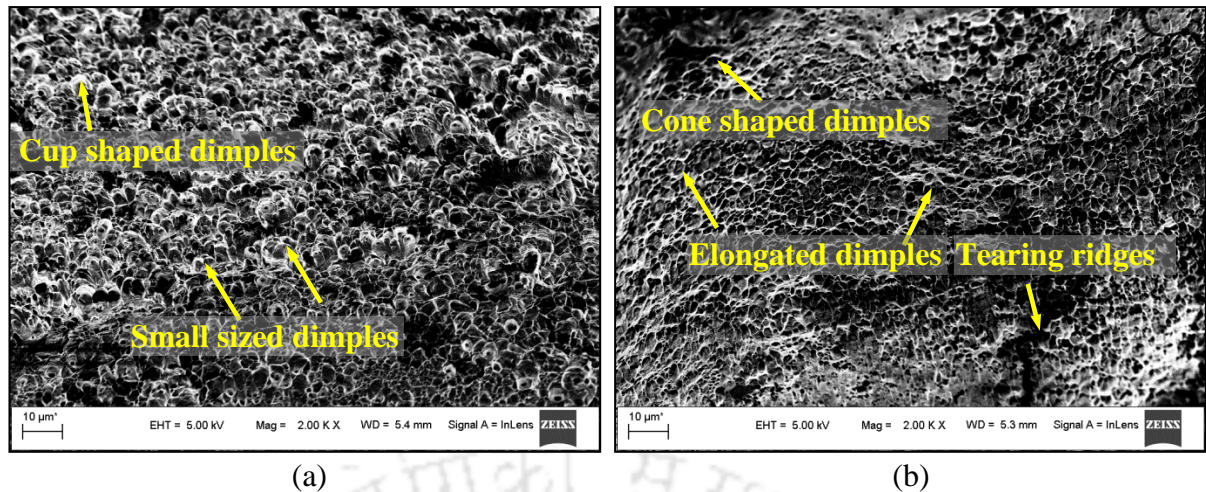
Fracture surface morphology of (a) BM and (b) weldment for Exp. 13 (Table. 7.2)
